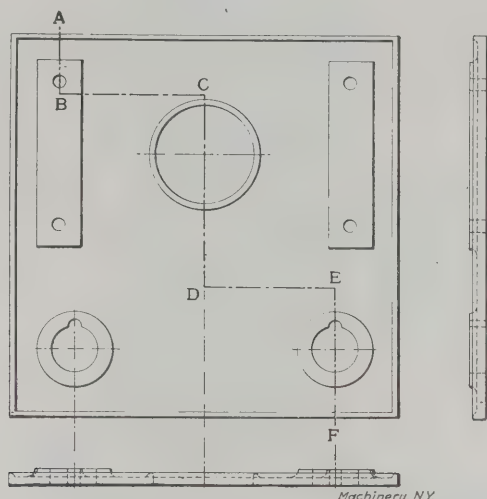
Type of Drawing used for the Elementary Exercises in Blue-print Reading
